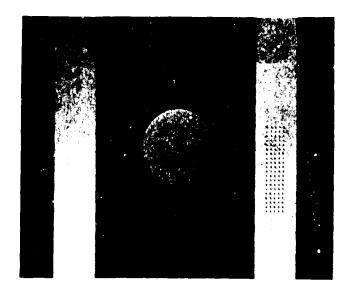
Typical Strip Bending Specimen with 5-Mil Diameter Holes Produced by the ECID Process. Hole Exit Surface is shown at Left and in the Center and Hole Entrance is shown at Right
